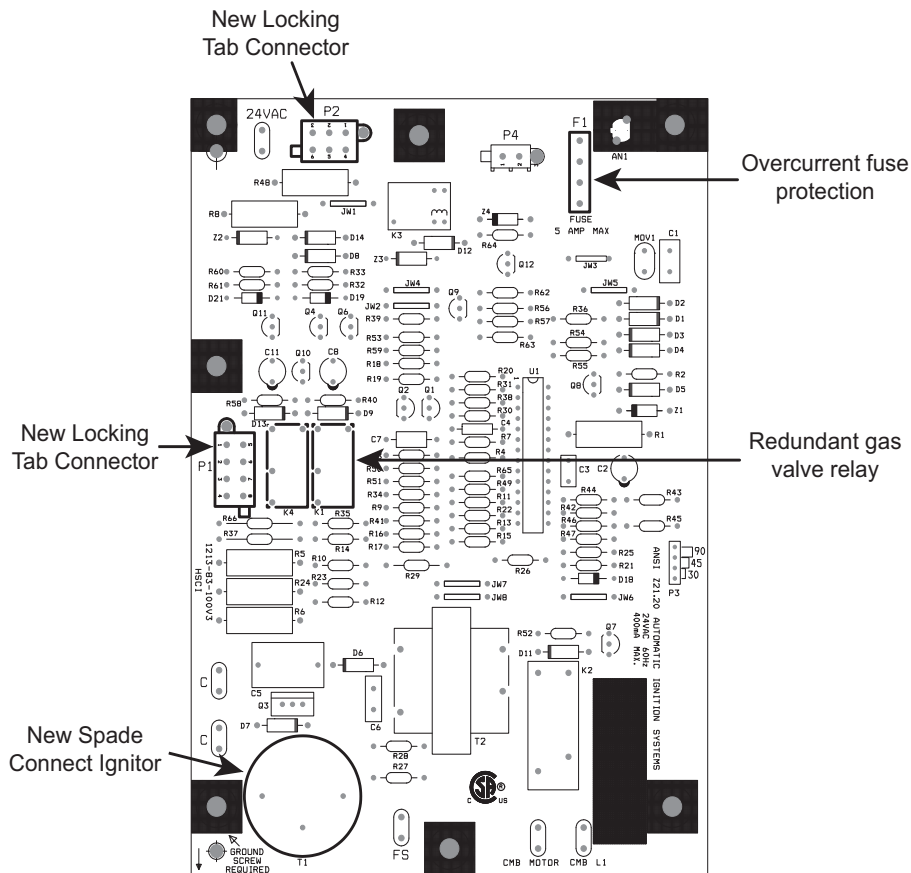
Component Layout of New Designed Integrated Gas Control (IGC) Board
